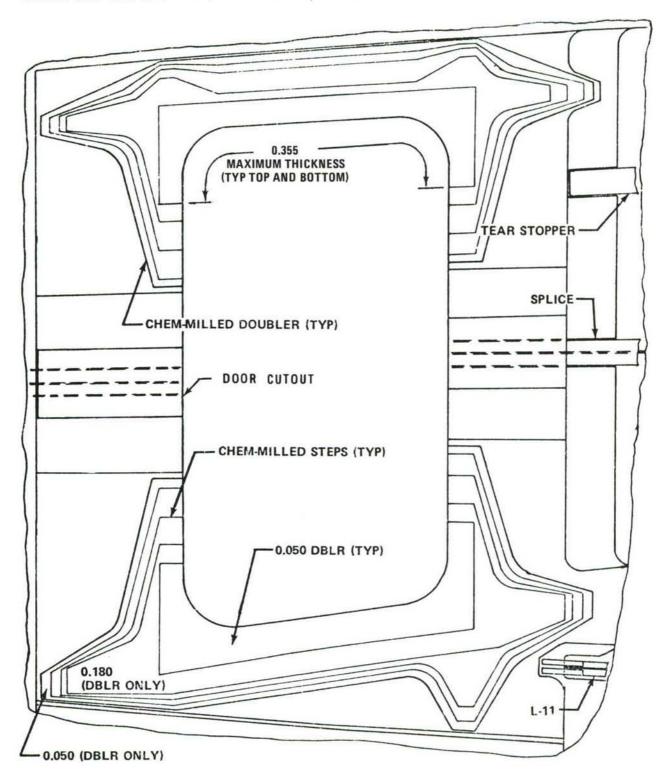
DOOR CORNER DOUBLERS (LOOKING INBOARD)
